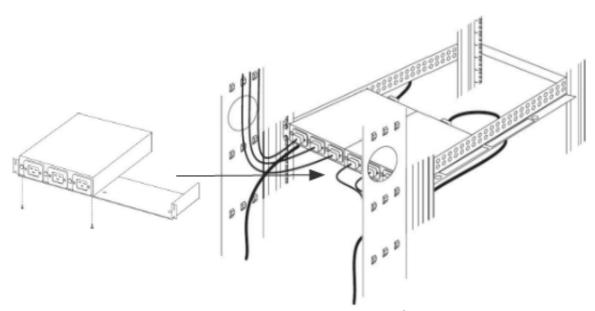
Front-end PDU horizontal mounting in 1U space of rack
